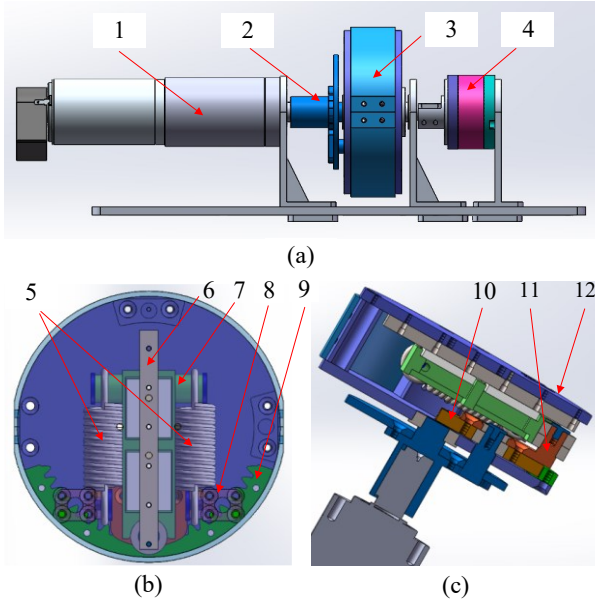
Mechanical model of the actuator. (a) Overall structure, (b) planar view, (c) section view. 1- Motor, 2-Input frame, 3-Compliant actuator, 4-Force/Torque sensor, 5-Tension spring, 6-Slide guide rails, 7-Transmission rod, 8-Spring retainer, 9-Gear, 10-Pinon, 11-Passing component, 12- Output plate.
